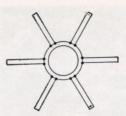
Several rolled structural steel shapes can be combined into a single aluminum extrusion, thus eliminating joining costs and permitting closer tolerances.
